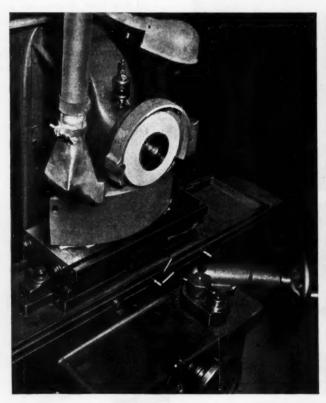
A Series 20 Wheel being Used to Grind a Cast-iron Machine Part. The Depth of Cut is 0.020 Inch
